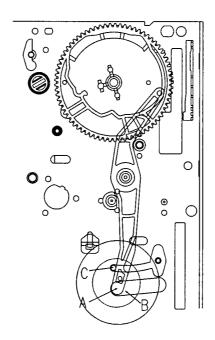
DATUM POSITION OF RELAY LEVER & CAM GEAR
